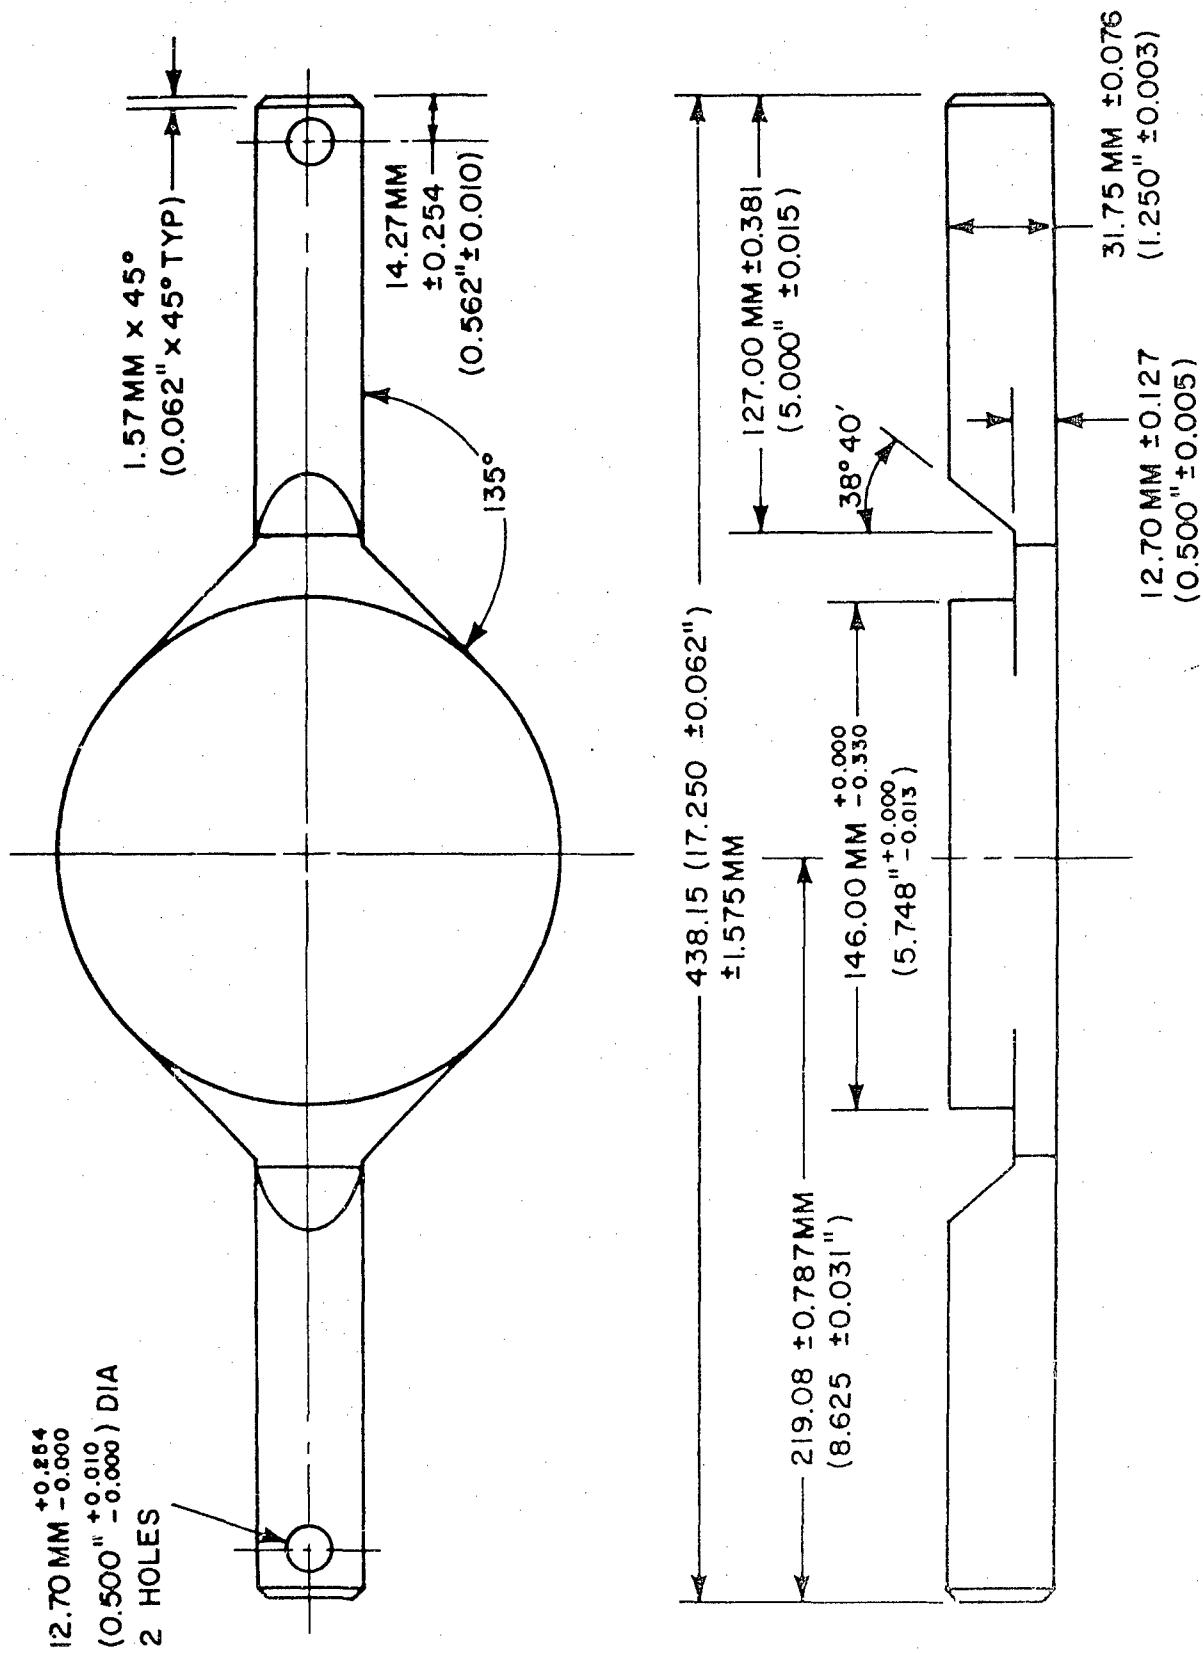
SUGGESTED SPLIT DISC TENSILE TEST FIXTURE
